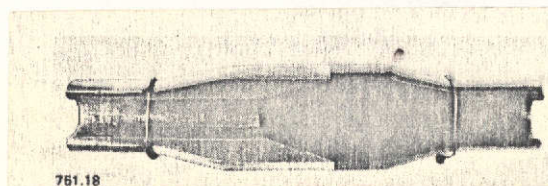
Section of a finished welded part. The part is bored out and finish-turned.
